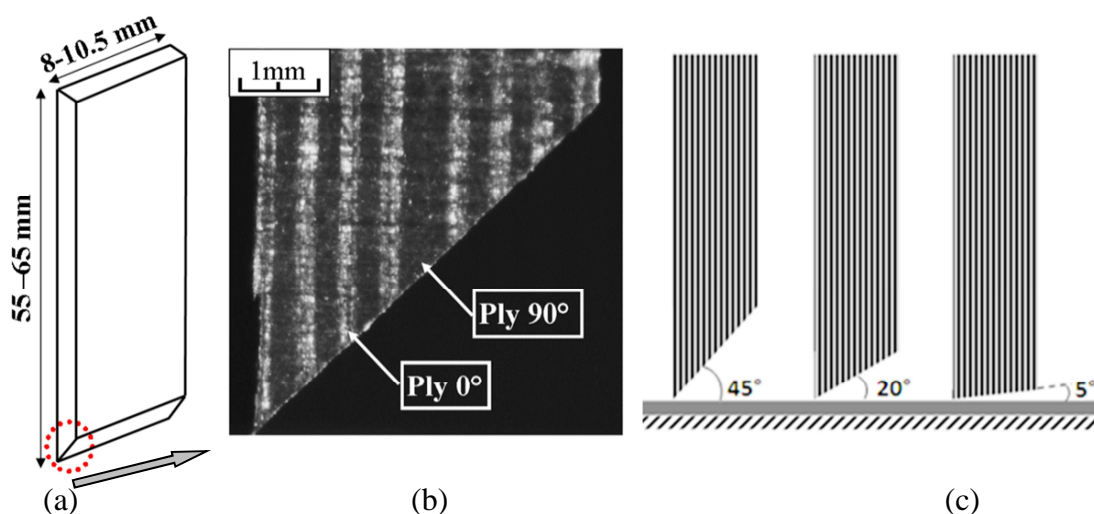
Specimen description: (a) geometry (b) T-0/90 chamfering detail (c) chamfer angles
